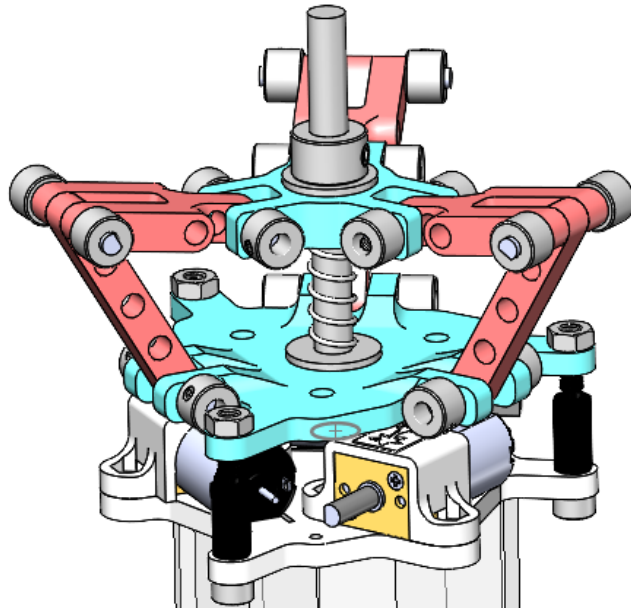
Passive end design CAD assembly rendering from 2022 Iteration Report [1]
